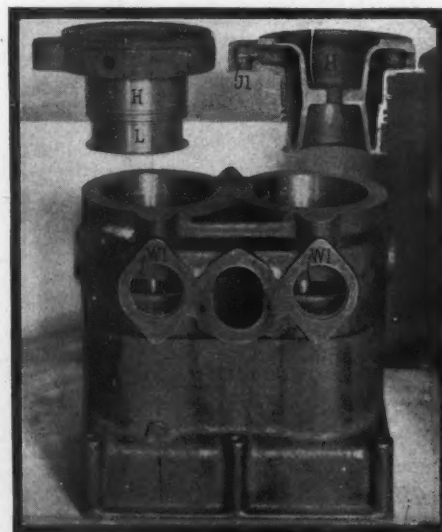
One Pair of Stearns-Knight Cylinder Castings and Cylinder Heads Removed and One Head Shown in Section Illustrating How the Heads Are Completely Water-jacketed
